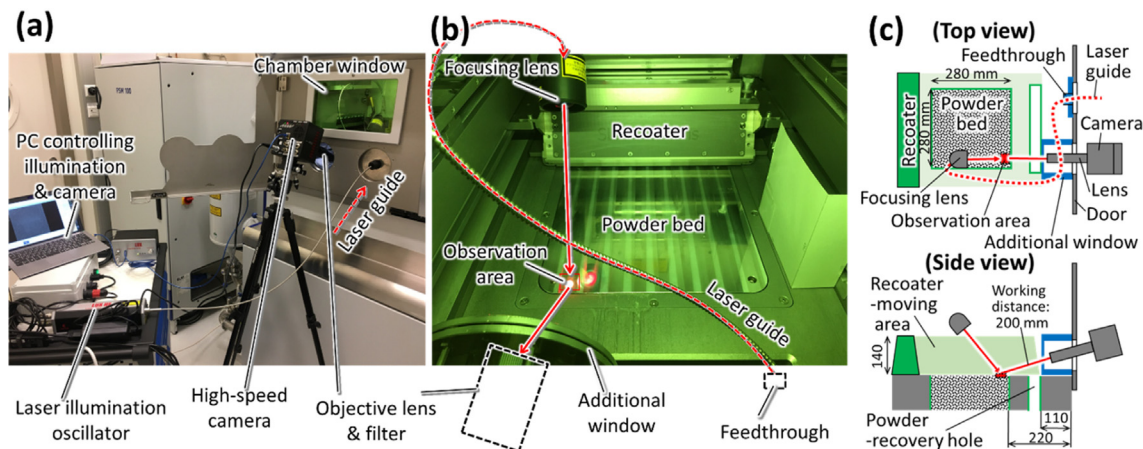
Experimental setup; photographs of appearance (a), inside chamber(b), and dimension(c).
